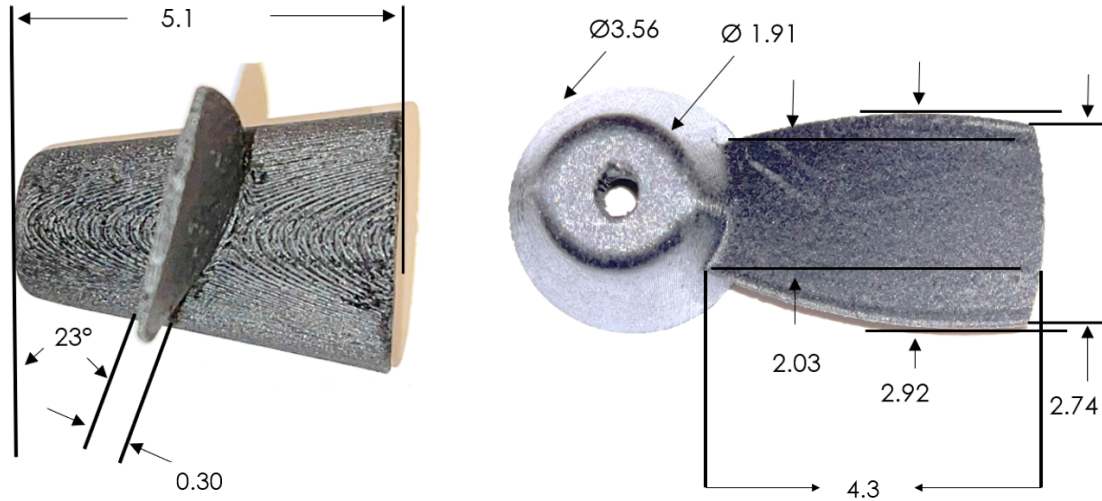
Side view (left) and top view (right) of single bladed propeller provided by ARMADA Marine Robotics, dimensions in cm
